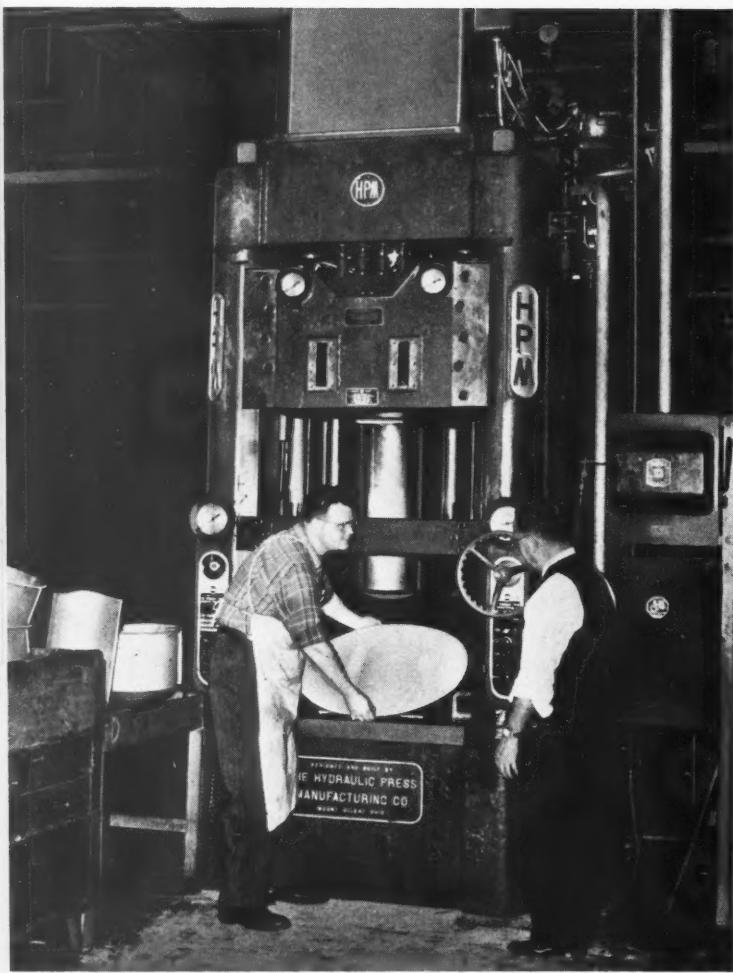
Hydraulic press of 150 tons capacity, equipped with a hydraulic blank-holder and die cushion, is advantageously employed for deep-drawing both large and small aluminum parts
